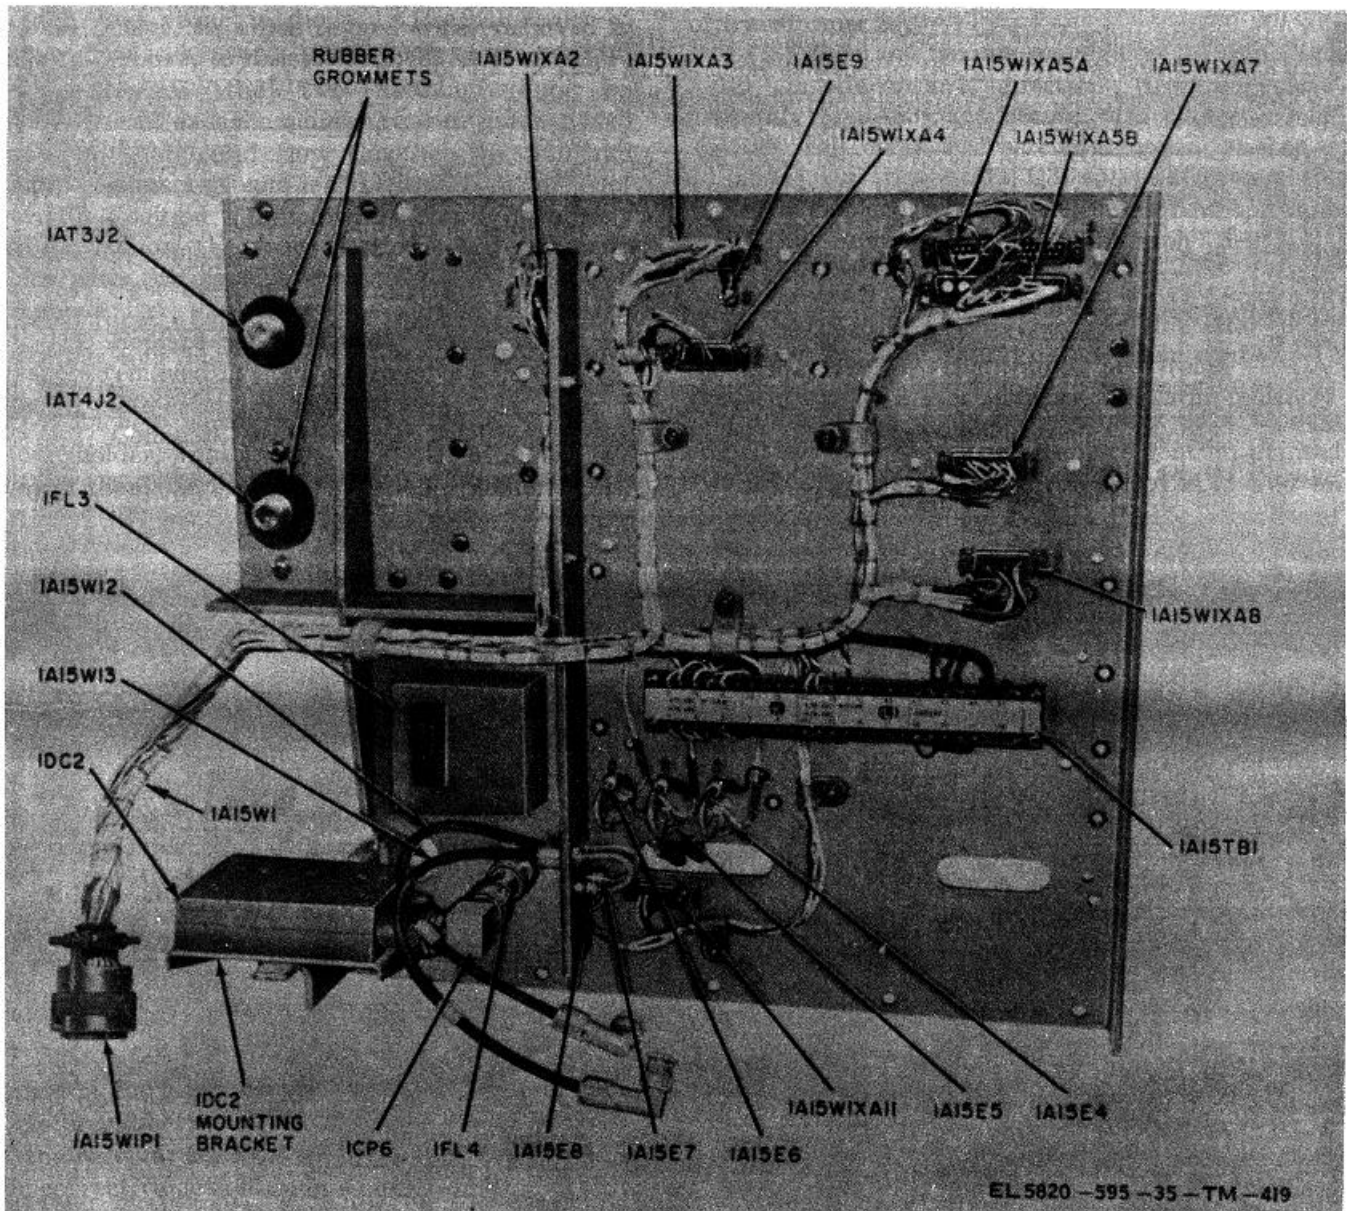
Transmitter plate assembly 1A15, rear view, parts location.
